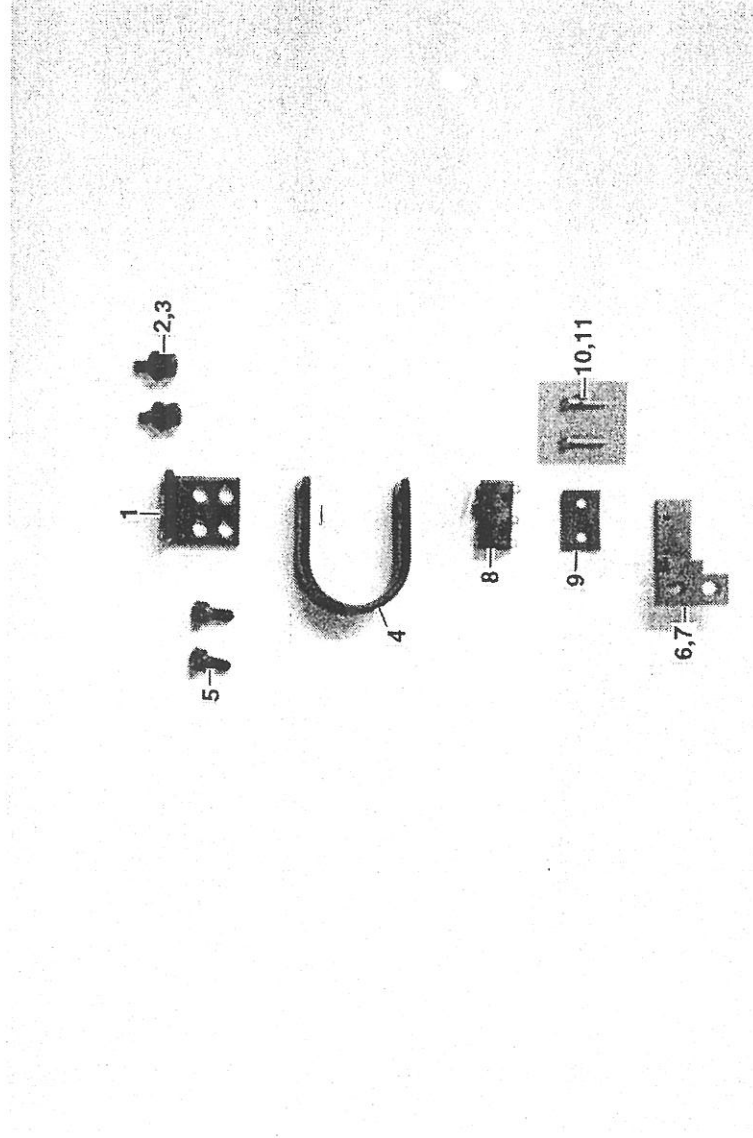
B X AND Y CARRIER PARTS: Y-Axis Limit Switches
